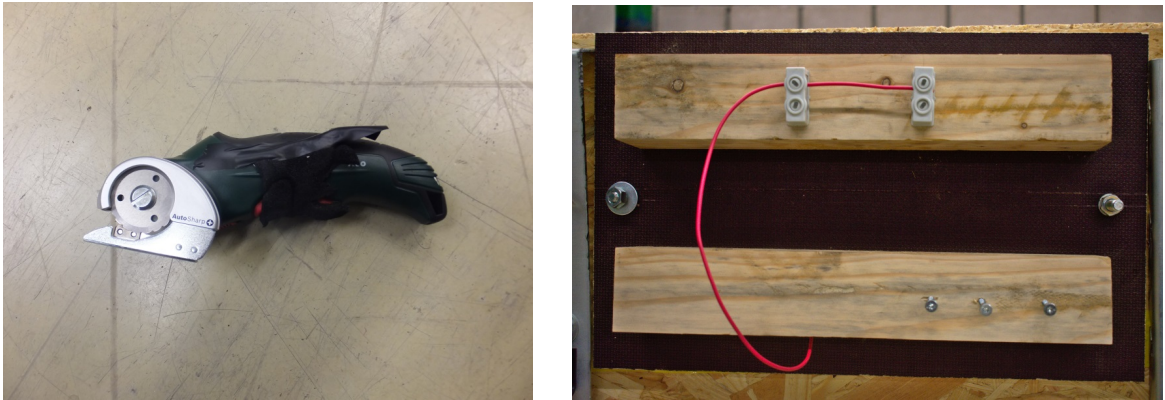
Left: the cutting tool. Right: the wire before being cut.
